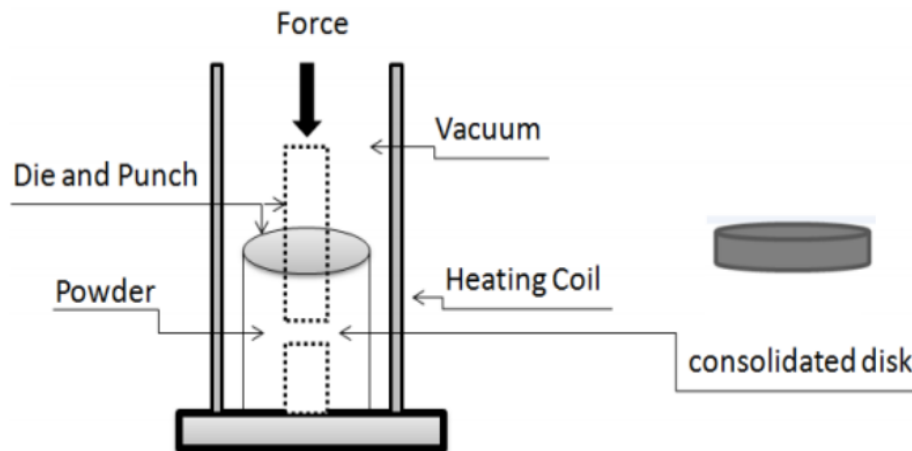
Hot pressed disk by uniaxial hot pressing
